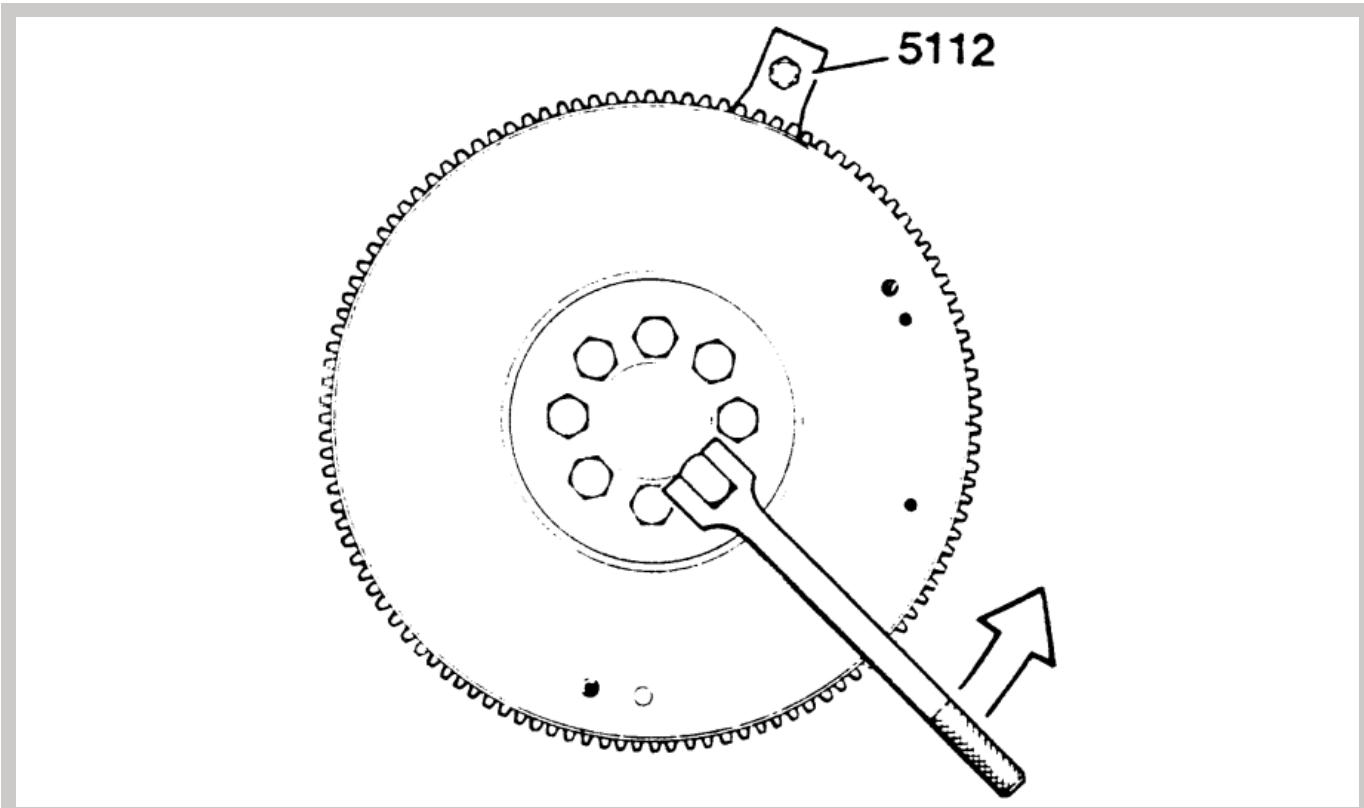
The flywheel must be immobilized so that the retaining bolts can be removed; tool 5112 is being used here to hold the flywheel
